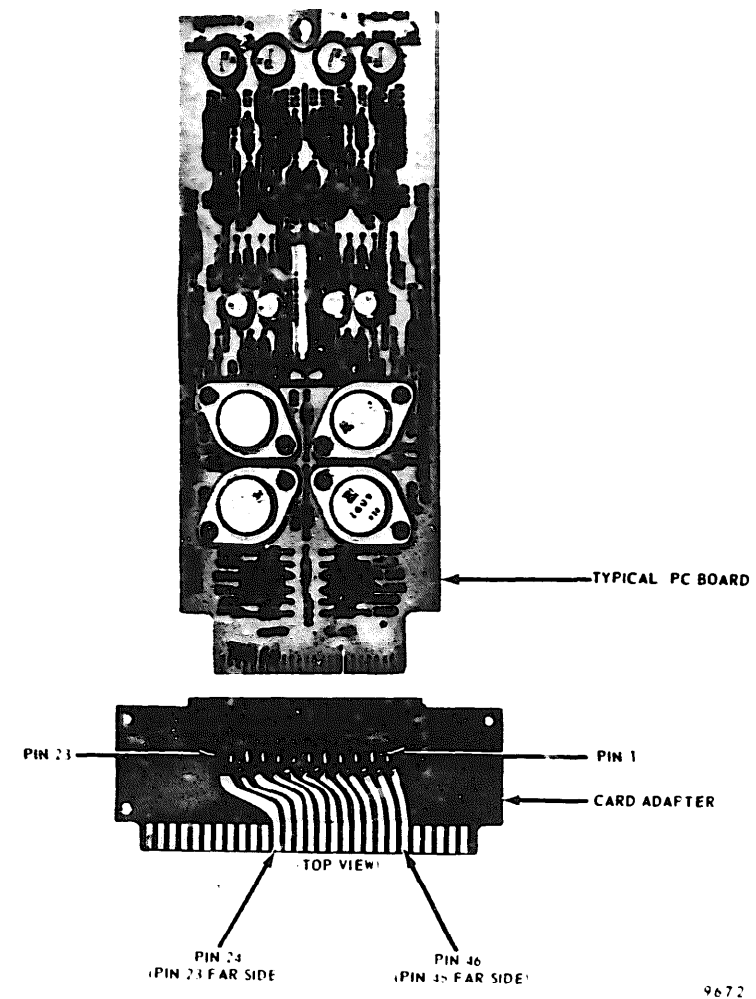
Printed Circuit Card Adapter MX-9089/USM-371
